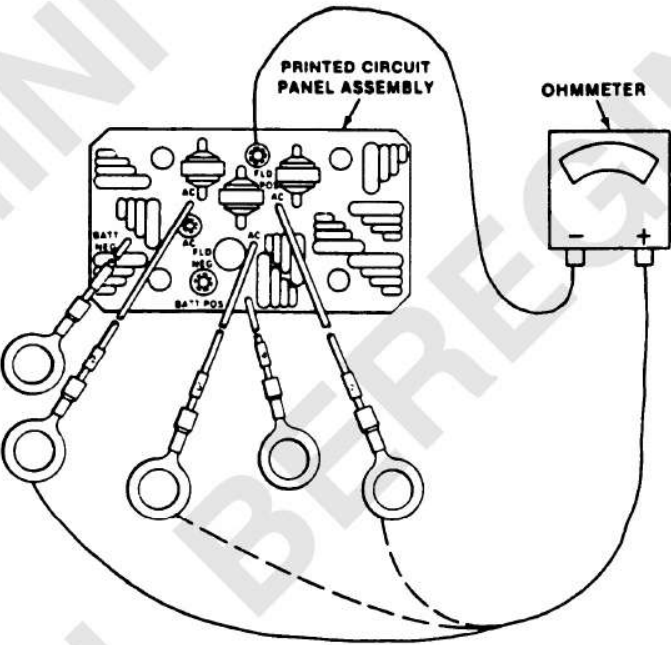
Open Printed Circuit Panel Assembly Diode Check.
